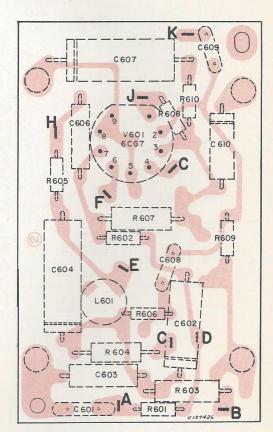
PW600 Printed Wiring Horizontal Oscillator Assembly
